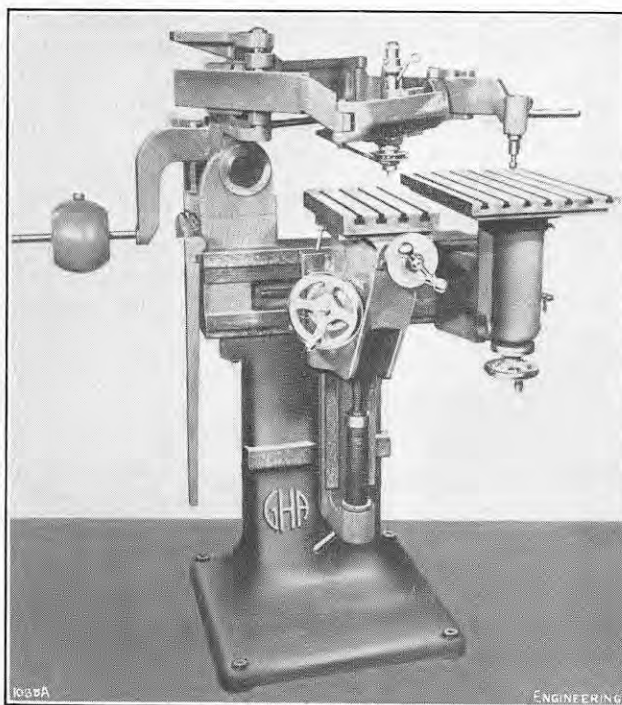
DIE-SINKING MACHINE; GEORGE H. ALEXANDER MACHINERY, LTD.
